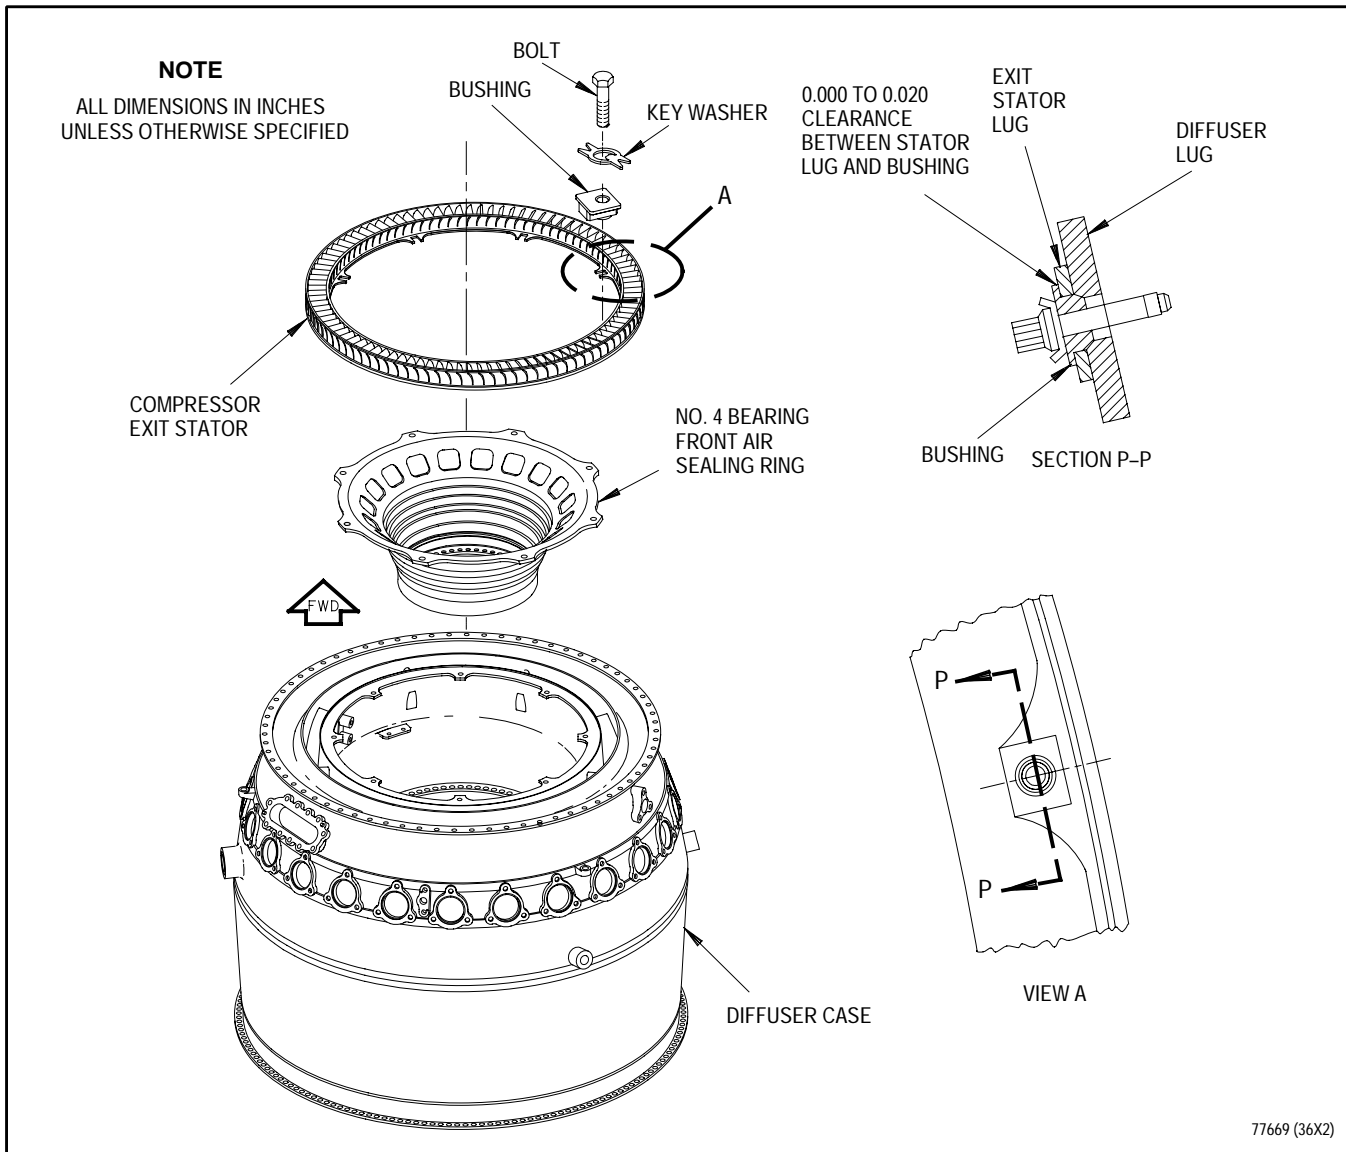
No. 4 Bearing Front Air Sealing Ring and Compressor Exit Stator Assembly - Installation
